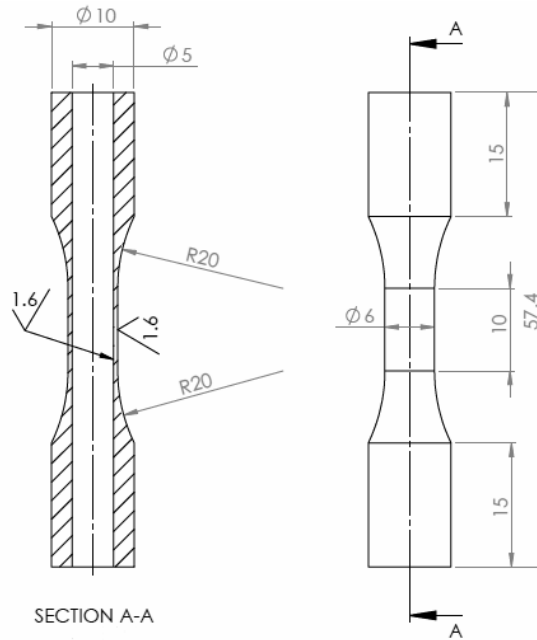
Tubular specimen tested for multiaxial fatigue.
